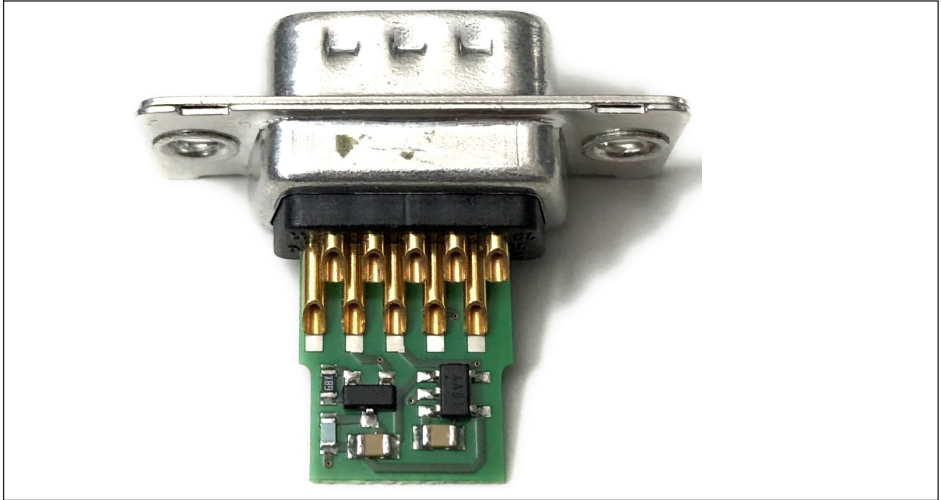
View of the TEDS module in the plug from below before soldering
